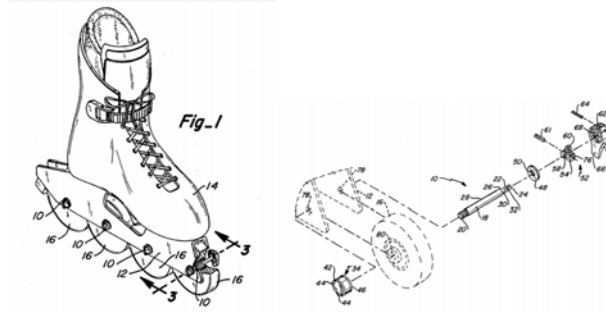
Donald Cech's Invention of "Releasable Axle Assembly for Skate Wheels"
